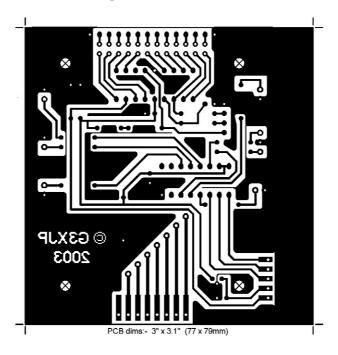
Status Board PCB track and drilling template. NB: This image is reversed
